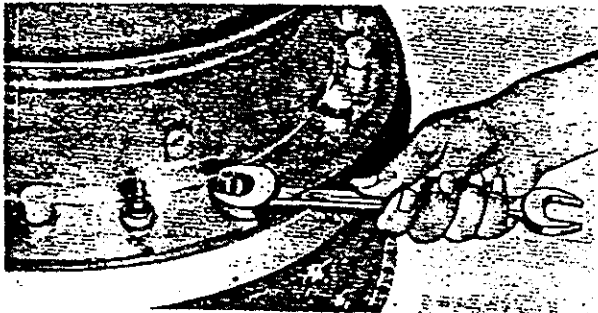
Removing Fuel Vaporizer Adapter Nut
